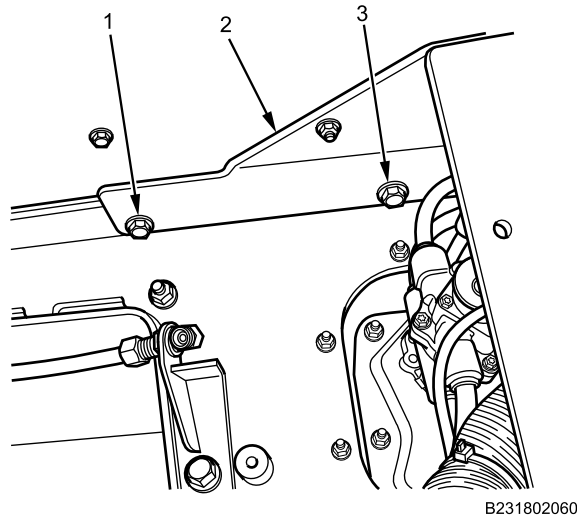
DCM Left Side Exterior Armor Upper Inboard Bolts.
